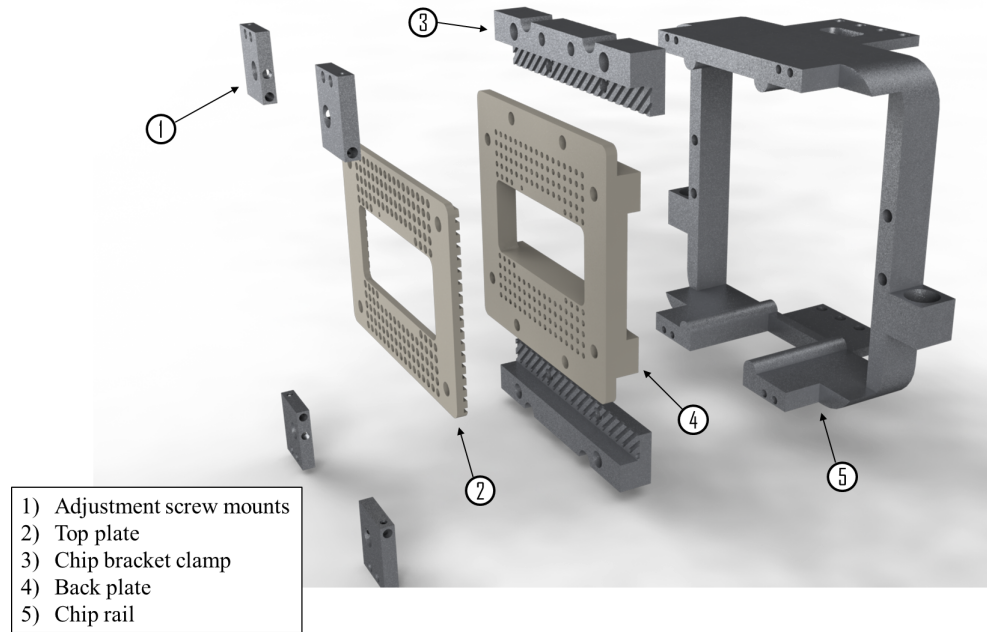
SolidWorks exploded view of the chip rail assembly. Four adjustment screw mounts, labeled (1), hold the adjustment screws that thread through the top and bottom chip bracket clamps, labeled (3). These hold the top and back chip plates, labeled (2) and (4). The top plate holds the male pin receptacles whilst the female receptacles plug into the back of the back plate. Grooves on the chip bracket clamps then slot onto raised rails on the chip rail (5).
